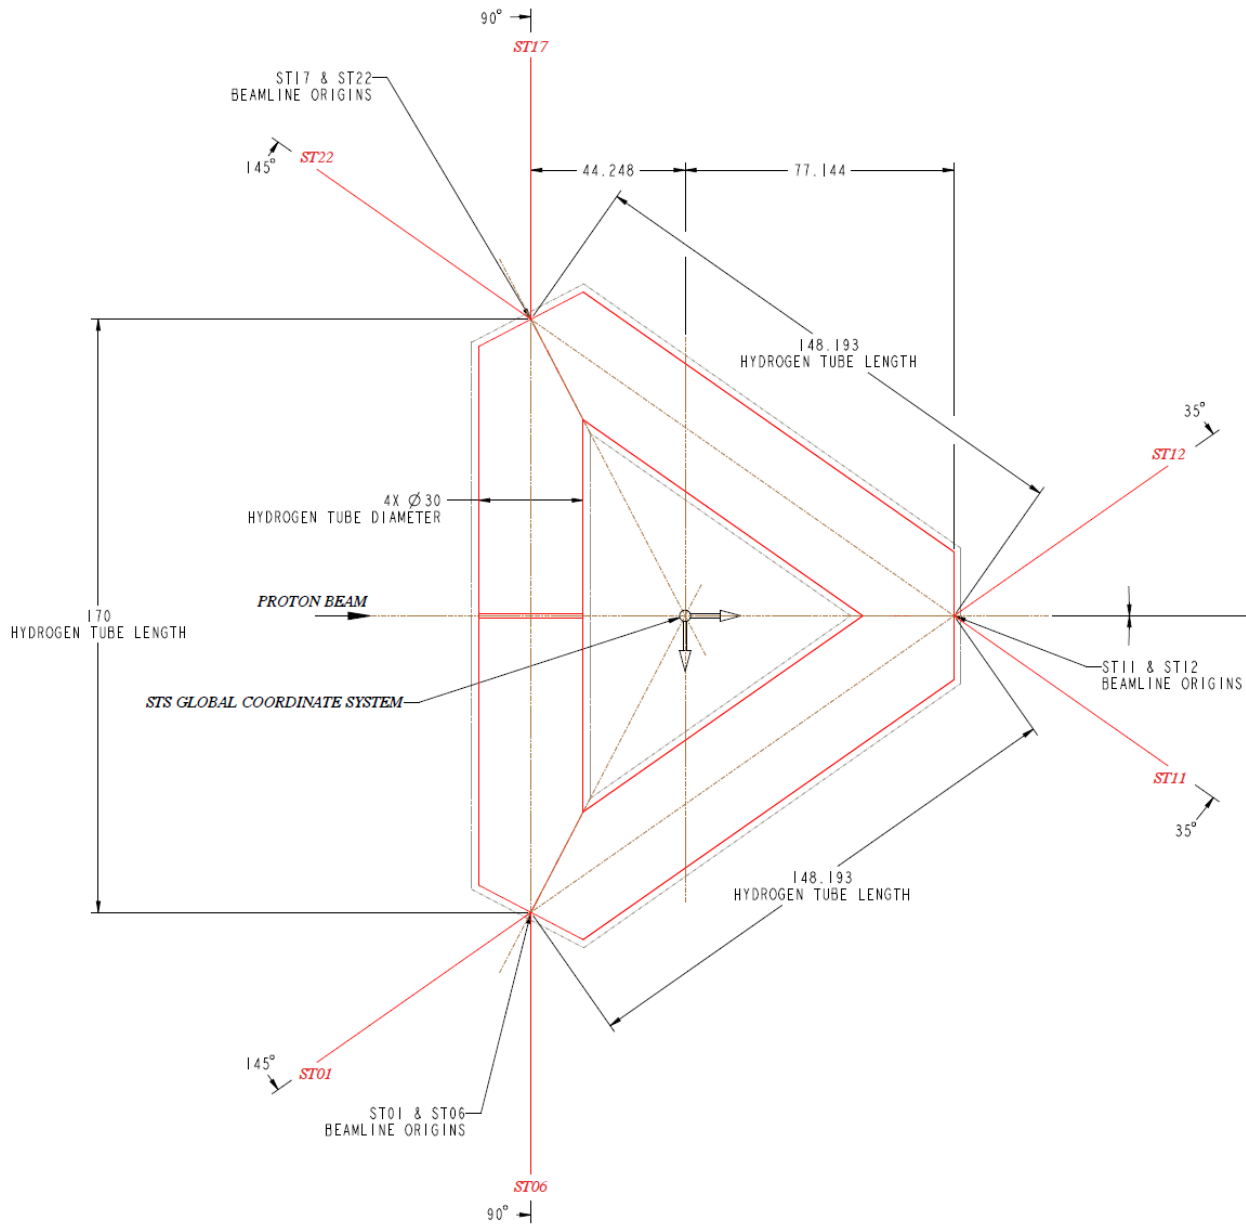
Tube Moderator Beamline Layout Plan View (dimensions in mm).
